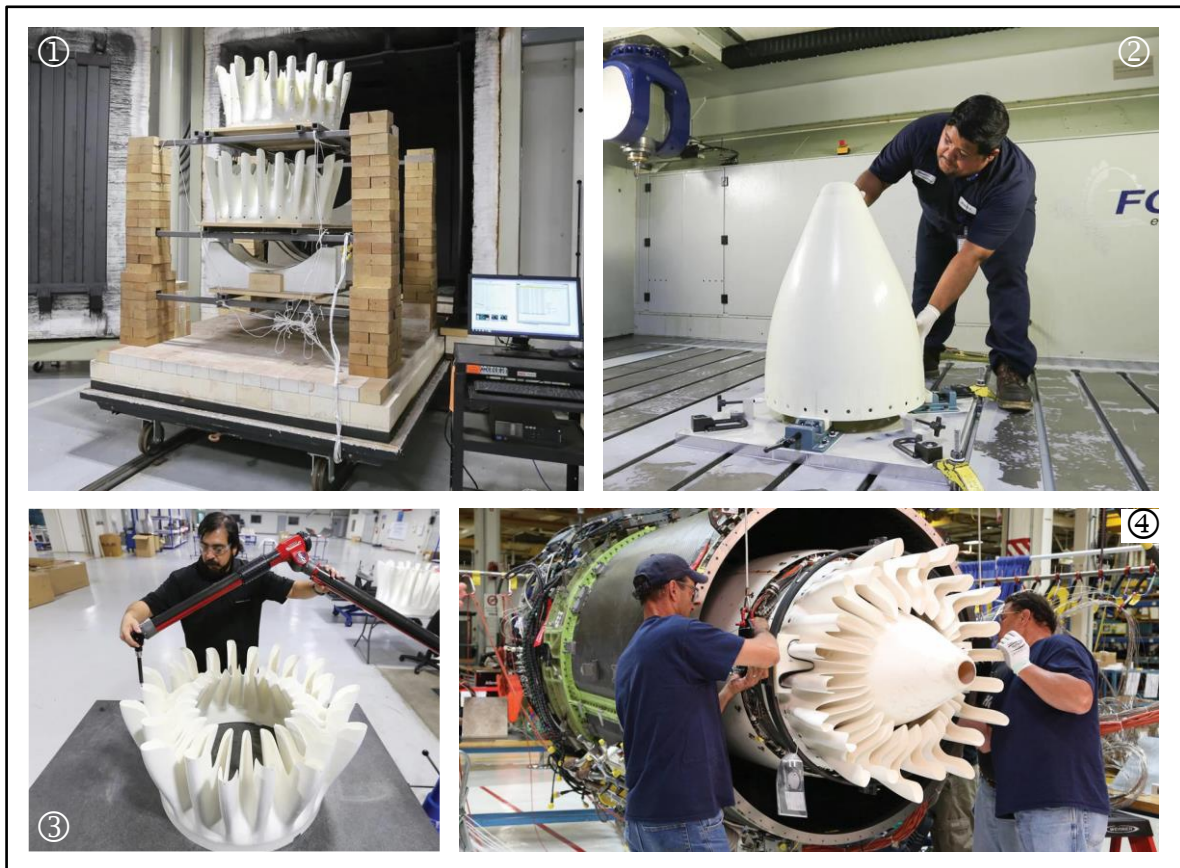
Manufacture and installation of an Ox/Ox exhaust mixer for GE's Passport 20 engine
